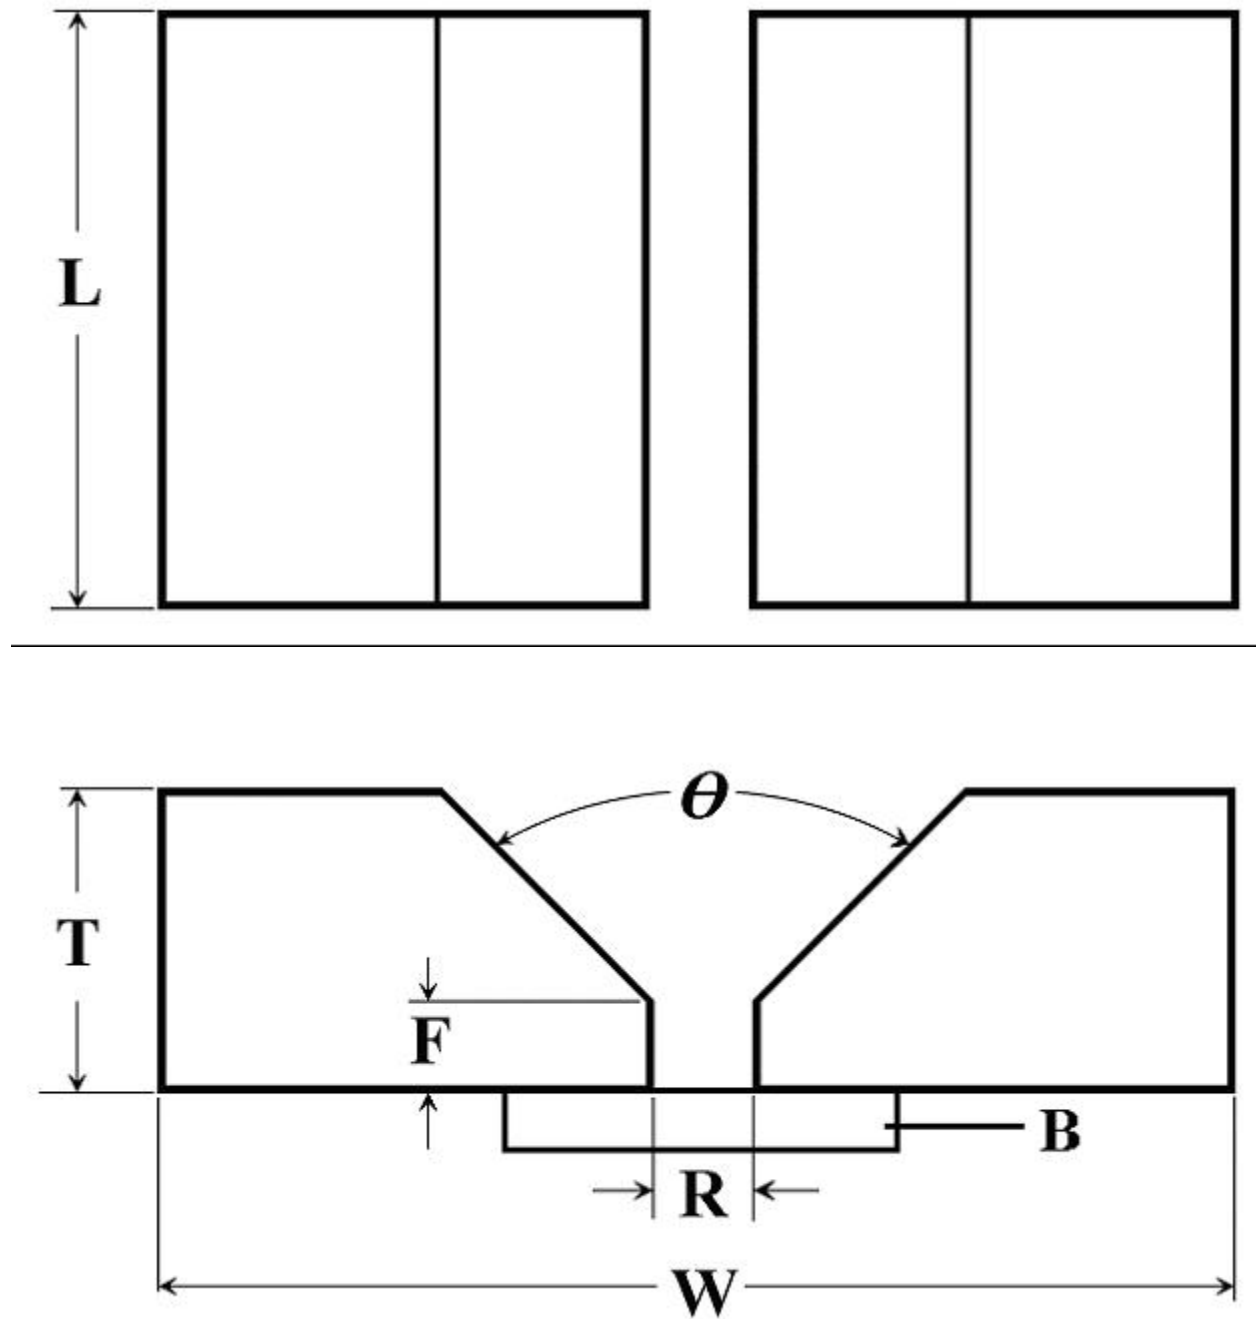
Single-V style weld joint configuration. ^{1/}
